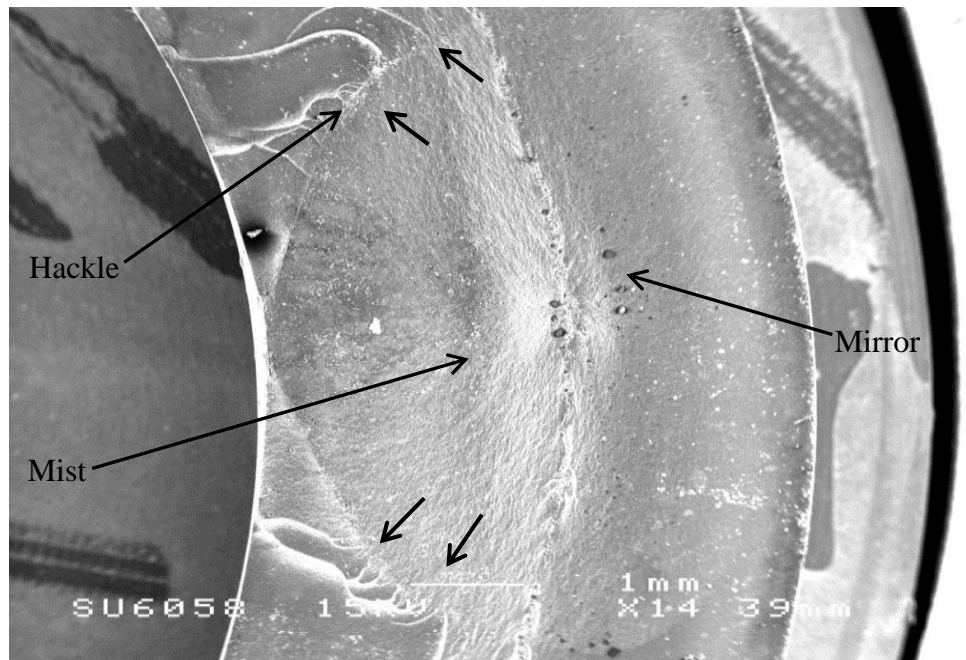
Mirror, mist and hackle morphology of the fractured surface of O-ring tested in 90 % CO₂ in methane, the crack direction is indicated by the arrows.
